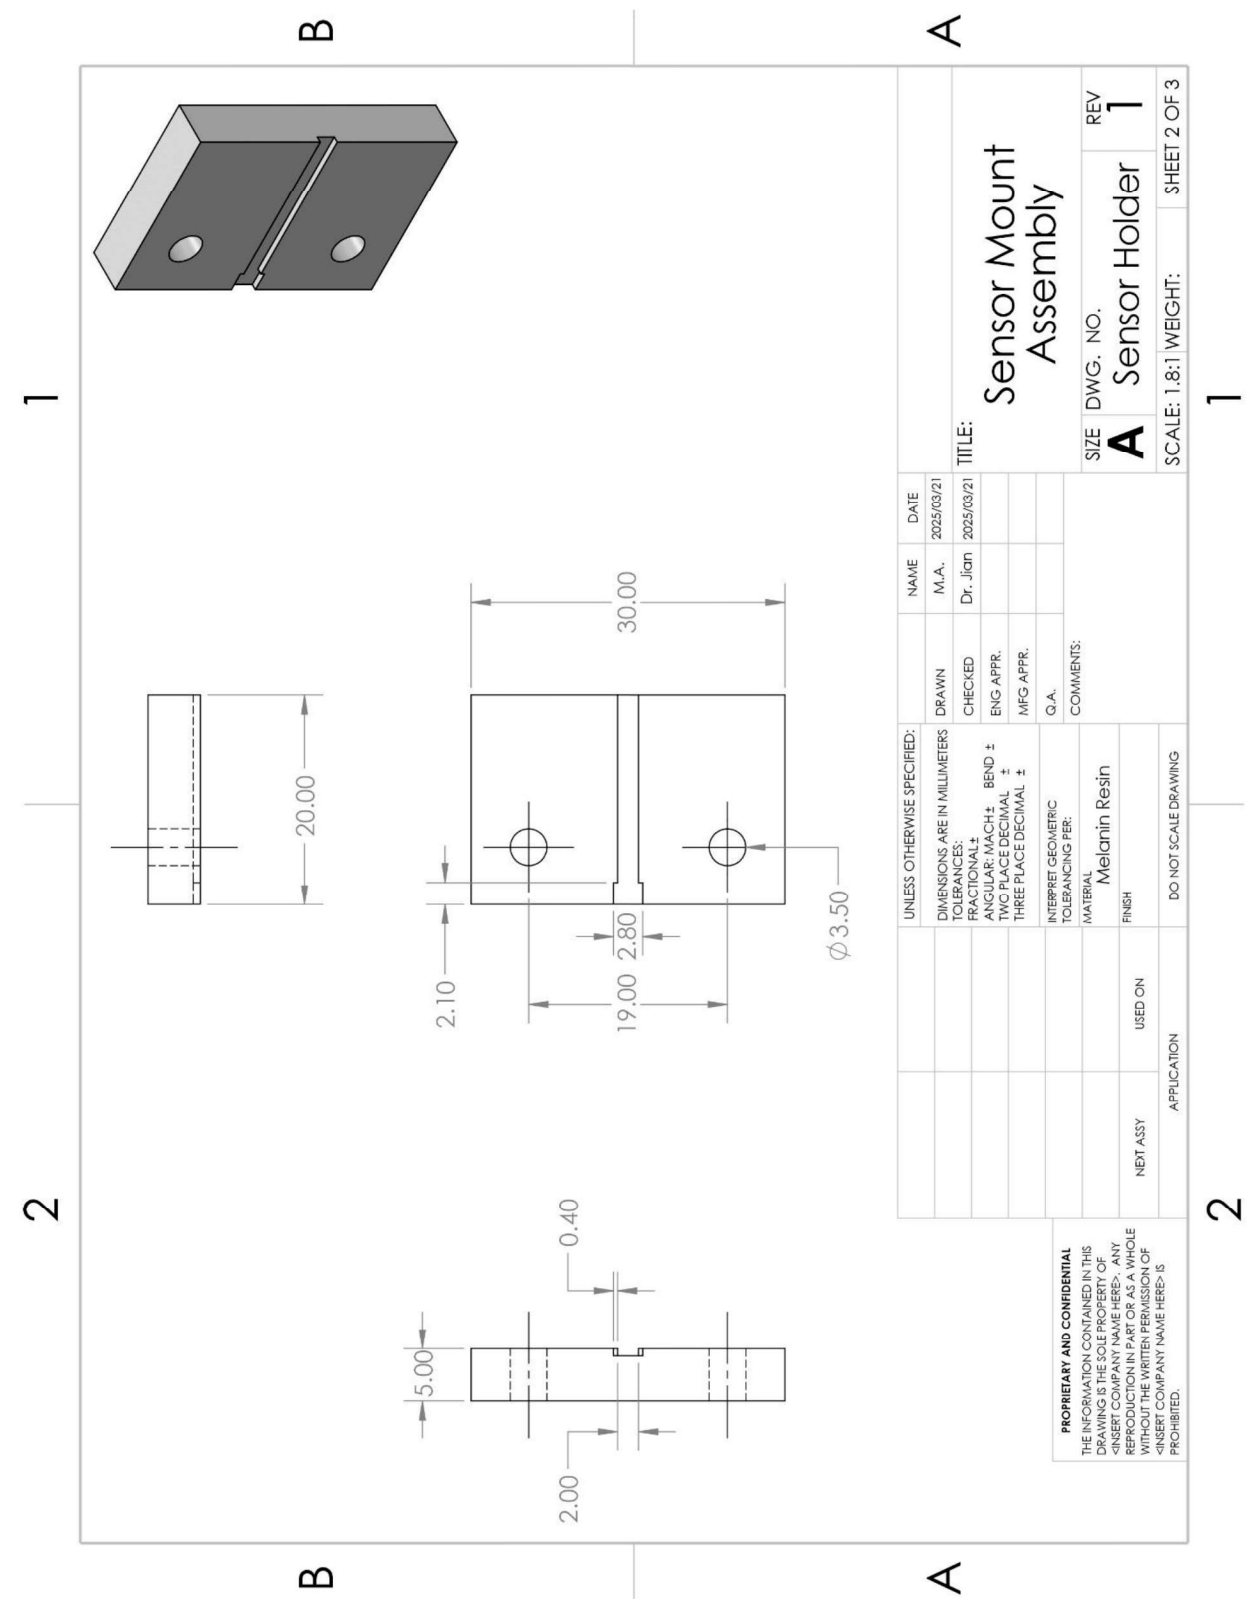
Detailed engineering drawing of 3D printed sensor holder.
